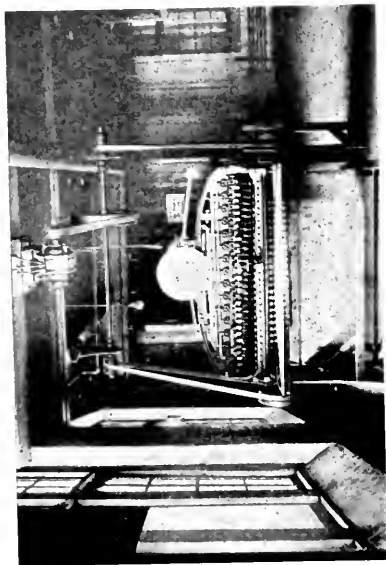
1 1/2-h.p. Induction Motor Driving Two Measuring Machines
